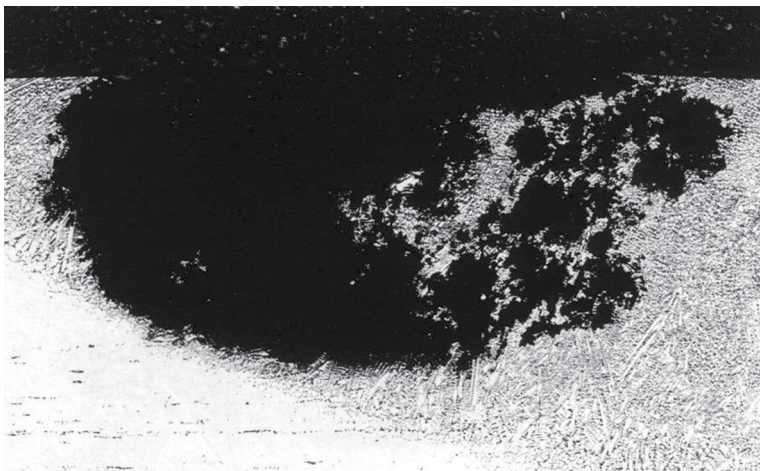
Severe pitting attack in superaustenitic stainless steel AL-6XN weld metal (© TWI).
